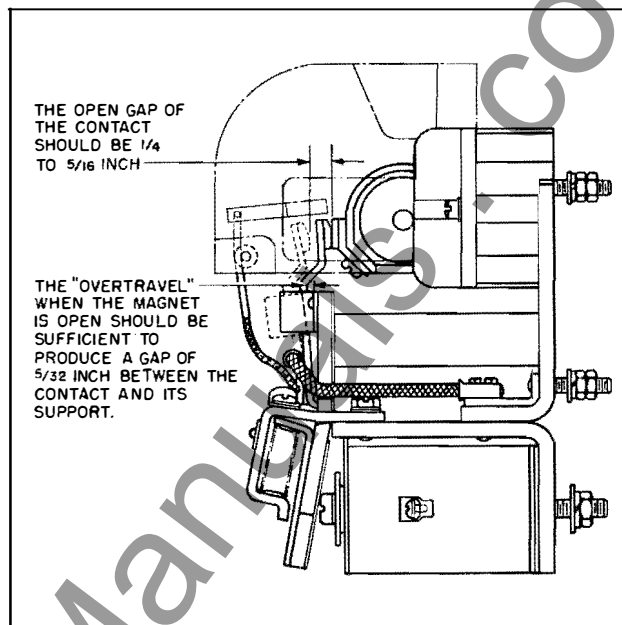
Sectional View of Types MM-301, 401 Contactors with Contact in Closed Position
